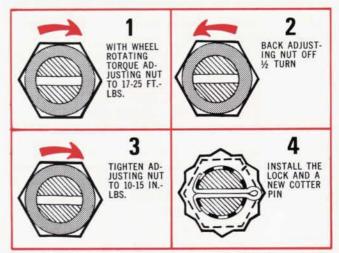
The FOUR Steps Necessary to Properly Adjust Front Wheel Bearings on Ford-built Cars
